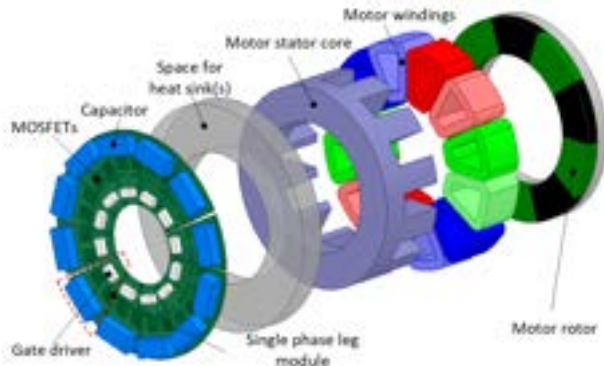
Exploded view of the motor and drive assembly. Coils of the same color belong to the same phase. The case with  $m=6$  is illustrated as an example.
